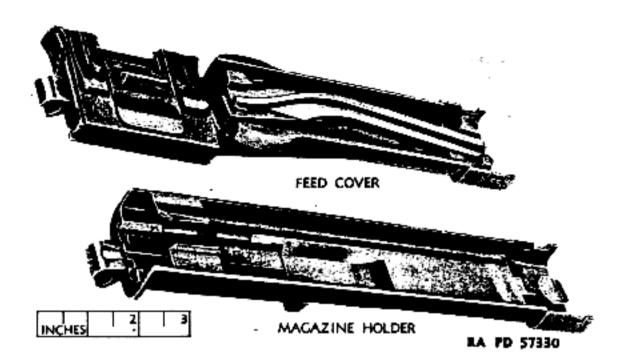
Feed Cover and Magazine Holder - Bottom View
